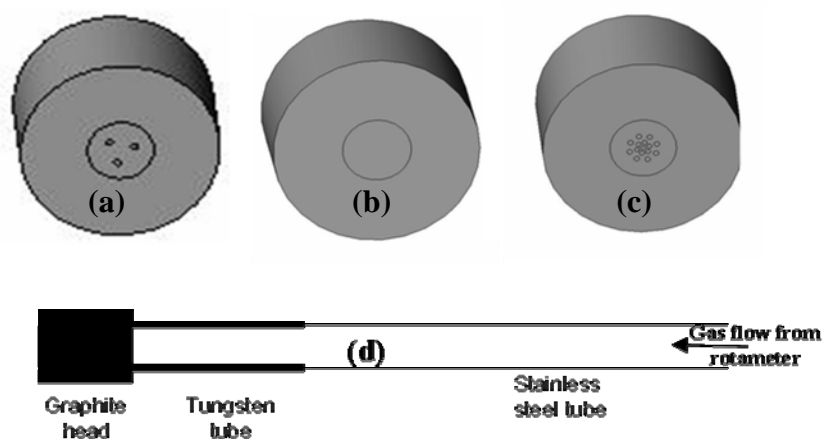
5 Different designs of graphite anode head (a) three holed (b) porous graphite head (c) sixteen holed head and (d) anode tube design.
